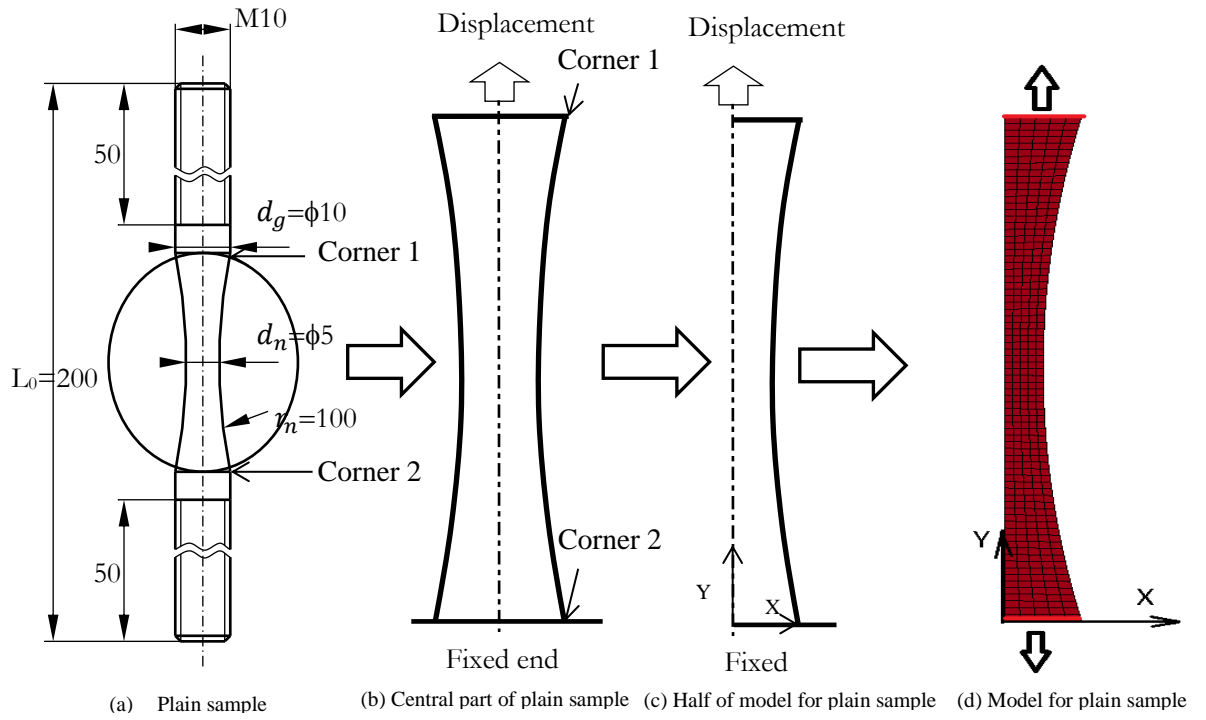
1 Schematic drawing of an Al6063-T5 plain sample and FE model (dimensions in millimetres).
